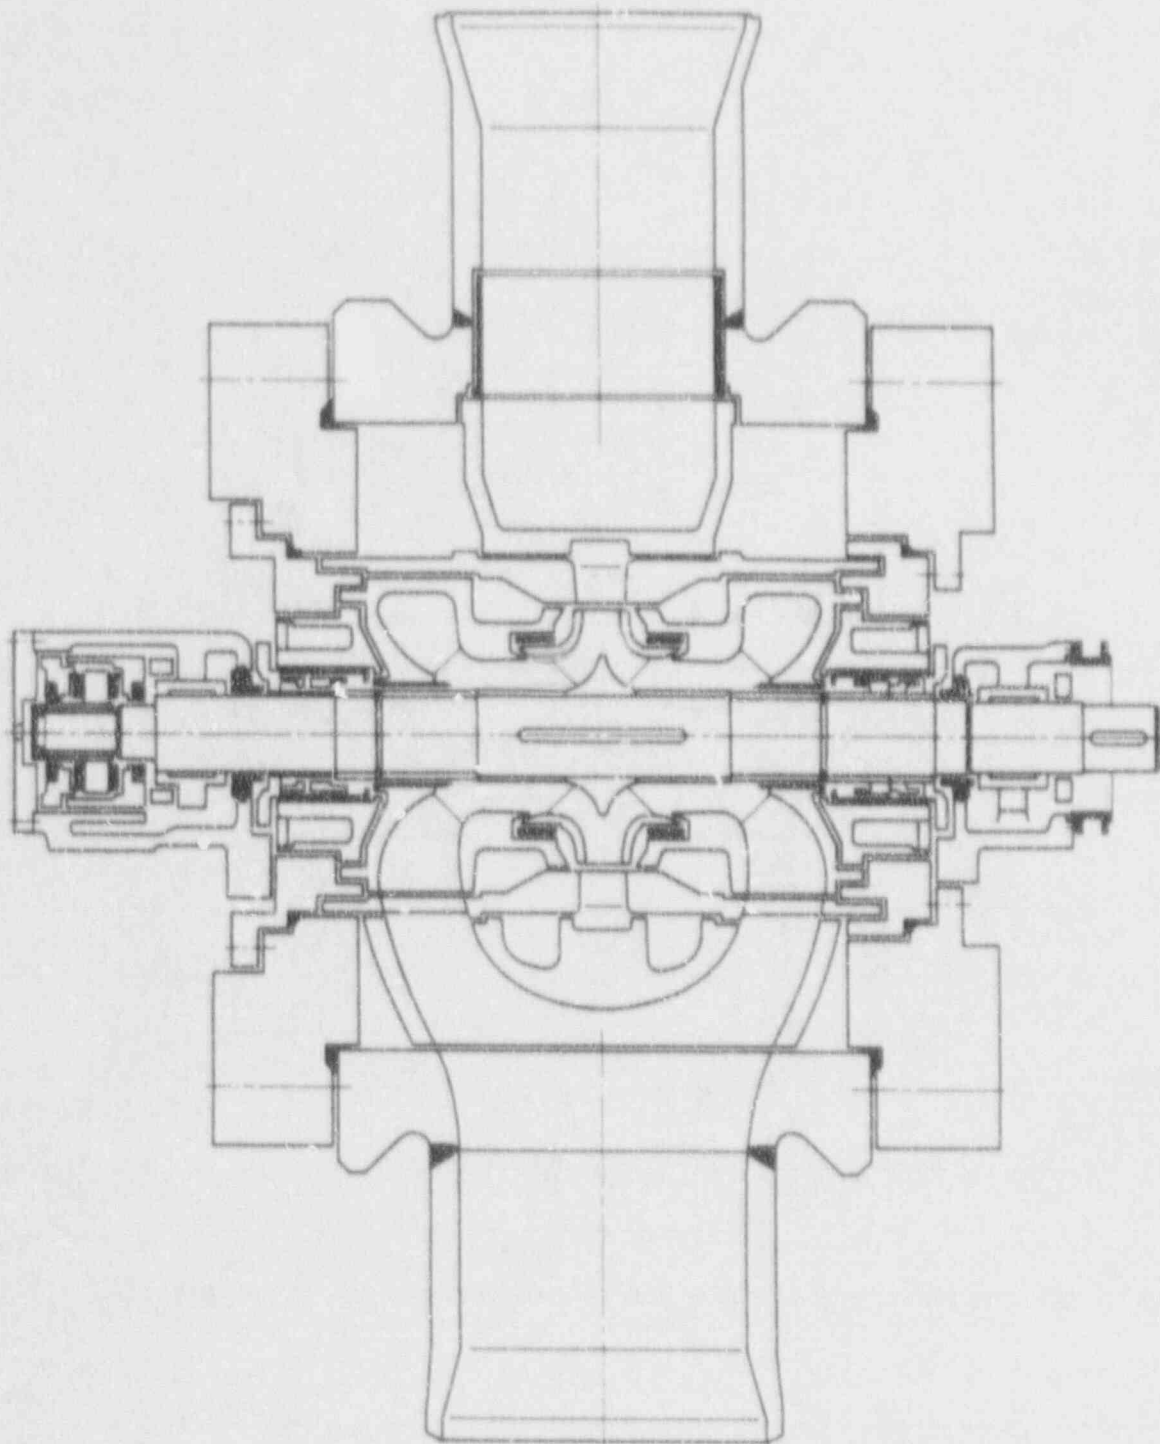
Boiler feed pump, main pump, forged casing (advanced main pump design).
